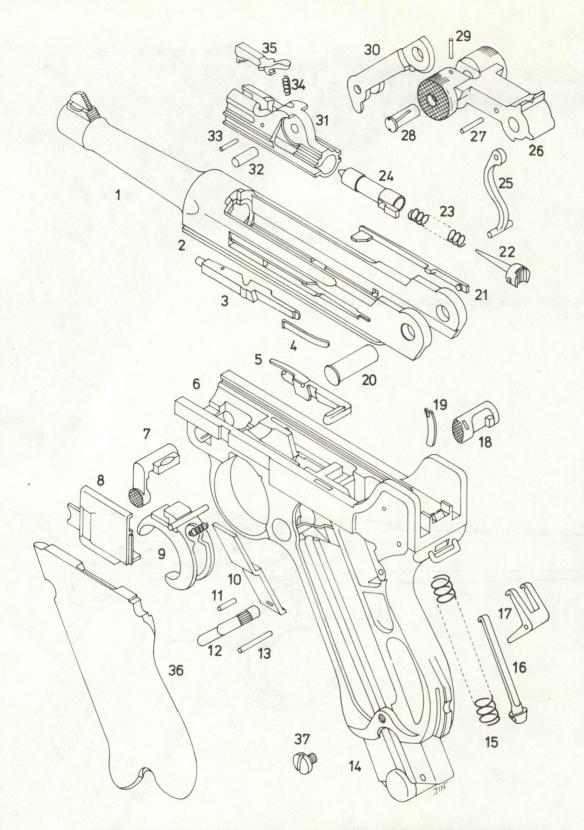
An exploded view of the 9mm Parabellum Pistole 08. (Jimbo)
